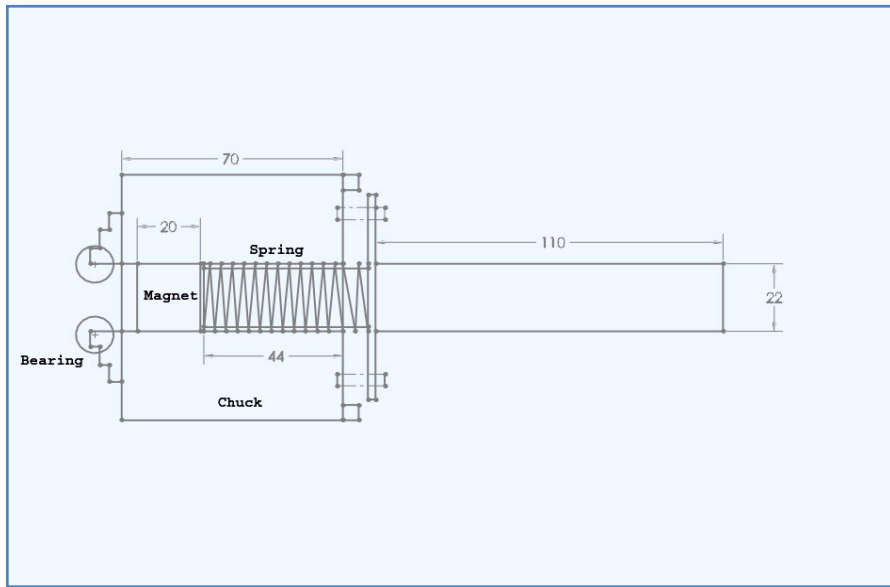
CAD Drawing of Ball Burnishing Tool
